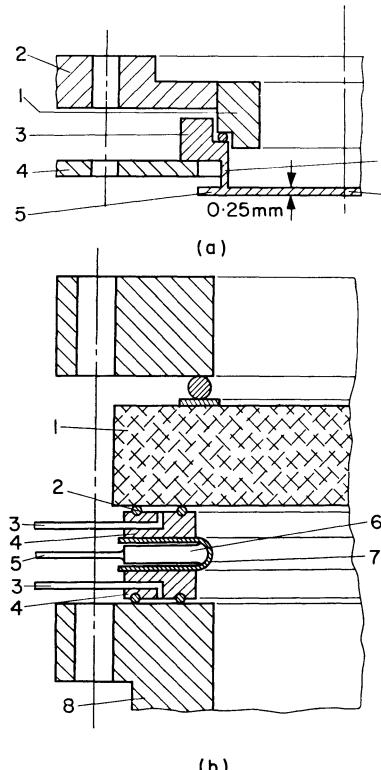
Windows, sealed with metal wires: (a) lead-tin alloy seal (Craig^{243a}); (b) seal with double lead wire and guard vacuum; (1) window; (2) lead-gaskets; (3) pumpout; (4) gasket ring; (5) helium inlet; (6) inflated stainless tubing (0.010 in. wall); (7) sealing diaphragm (0.015 in. lead, soft soldered to gasket rings); (8) chamber wall (Scott¹¹¹⁴)
